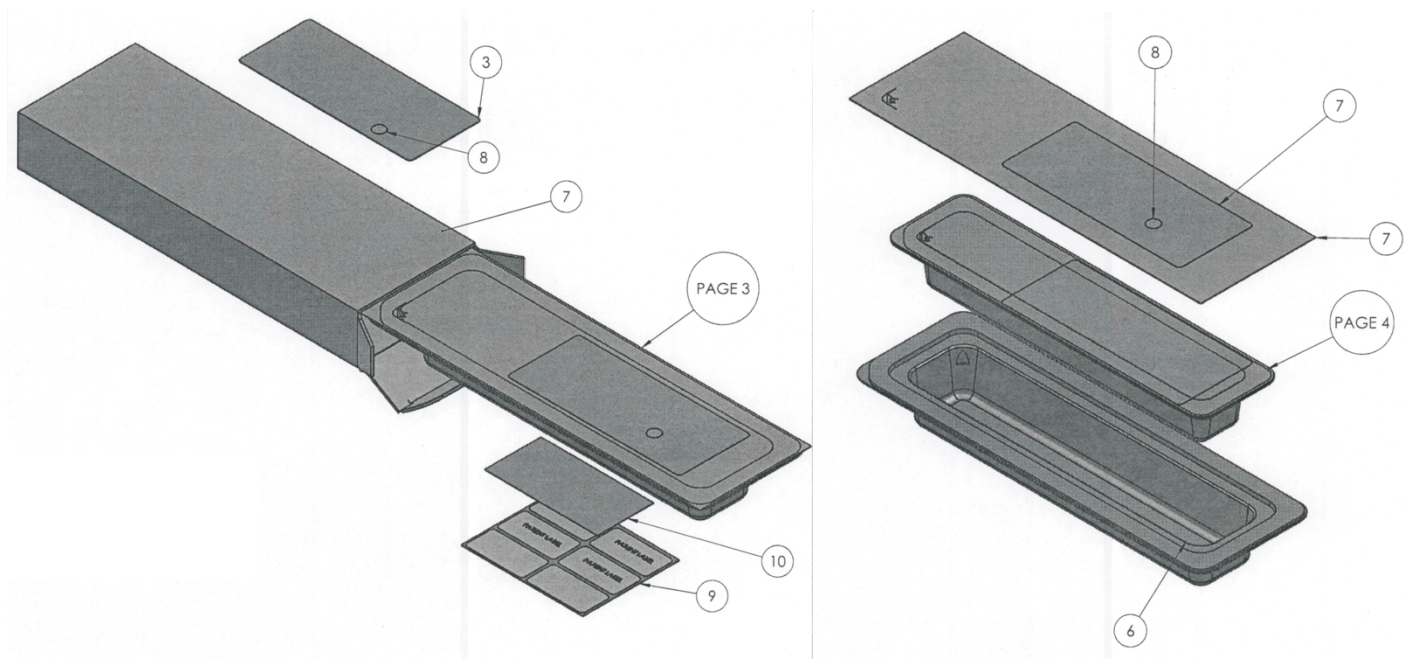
(left) Outer packaging components including label, carton, instructions for use, inner tray assembly. (right) Inner tray assembly components including sterilization indicator, label, outer lid, inner tray and outer tray.
